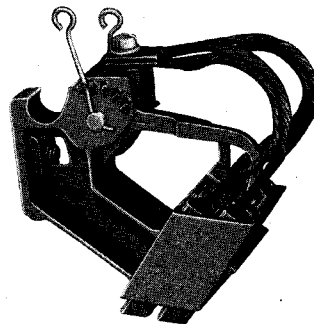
D-C. DOUBLE BRUSHHOLDER FOR QS GENERATORS AND MOTORS
